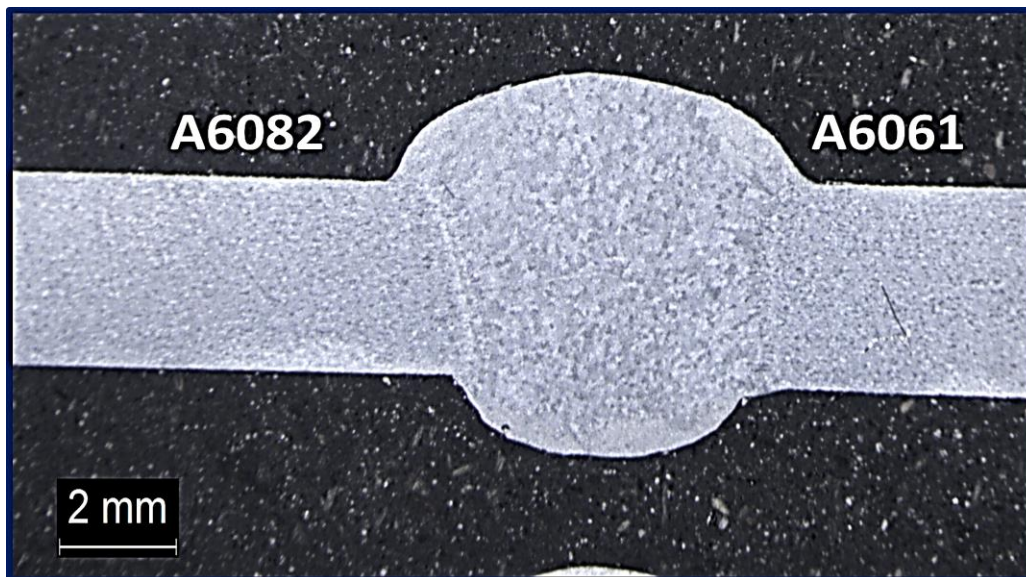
Macrostructure of transverse section of the CMT welded A6061-T6 and A6082-T6 joint using ER4043 filler wire
